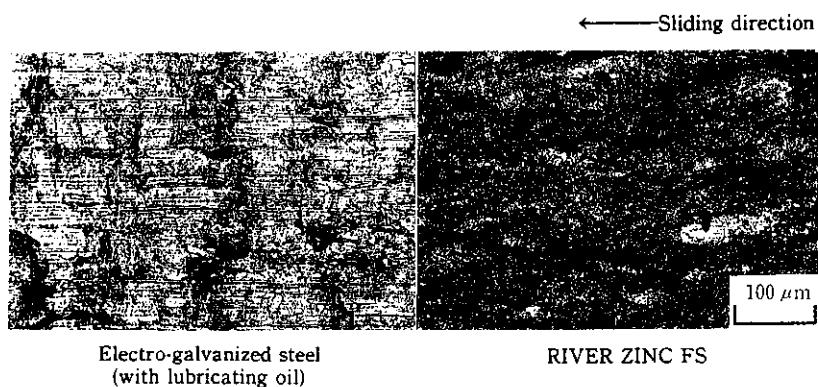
Surface morphology of formed parts after cup drawing test (by microscope)
